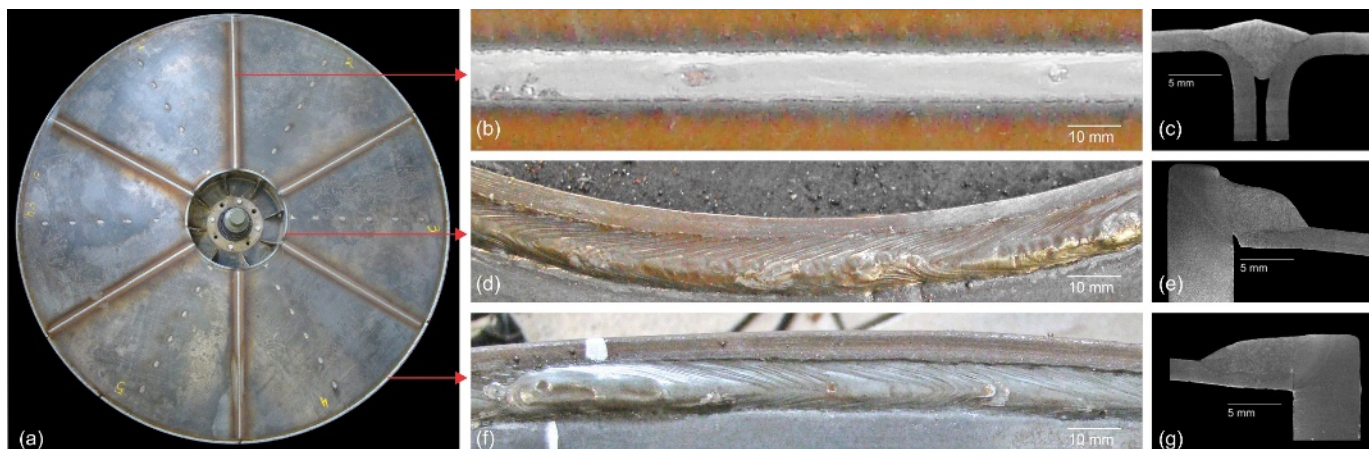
A — Weld beads deposited in the joints of side A of the largest wheel; B — weld bead JR; C — macrograph of the cross section JR; D — weld bead JCI; E — macrograph of the cross section JCI; F — weld bead JCE; G — macrograph of the cross section JCE.
